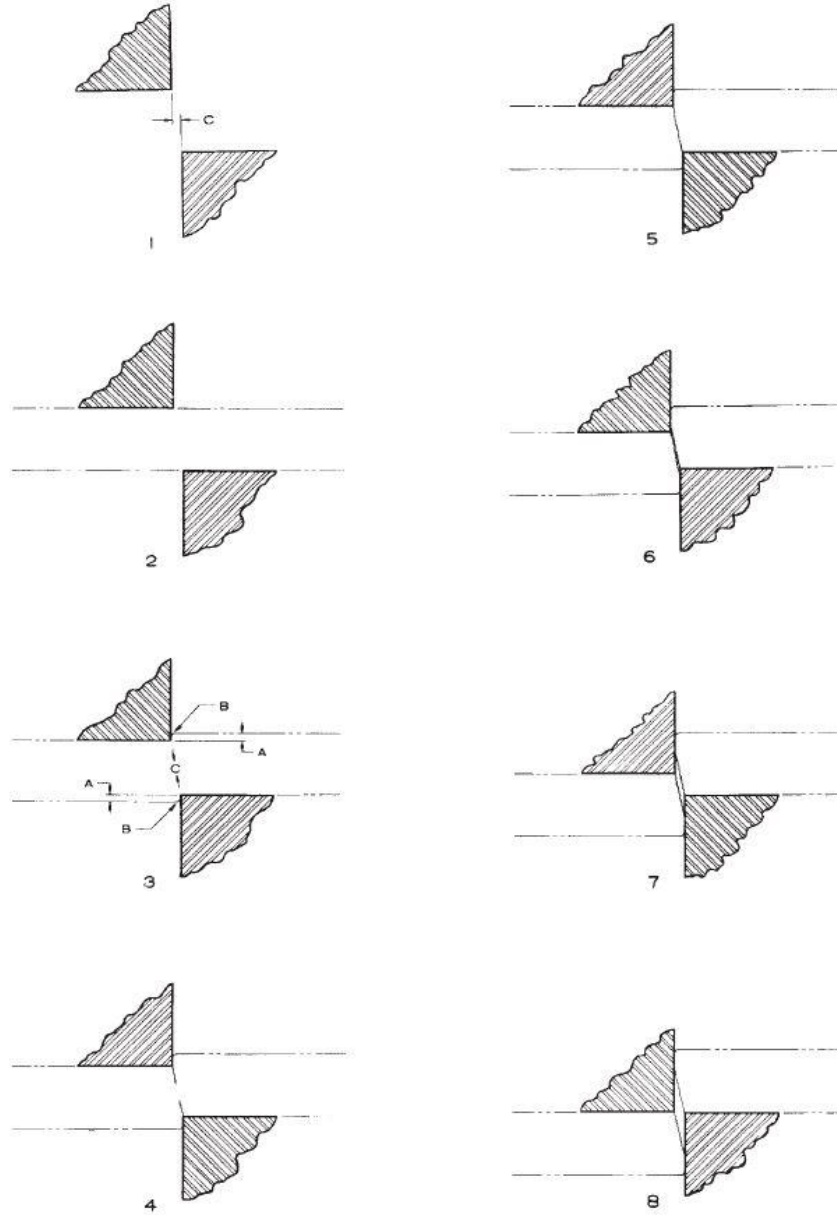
Mechanics of shear-enlarged views of clearance between cutting edges of a shearing die (step 1) and material undergoing shear (steps 2 to 8).
